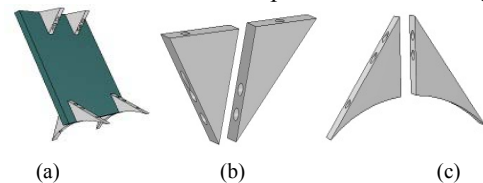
CAD drawing of (a) vertical struts with clamps attached, (b) top clamps, and (c) bottom clamps
